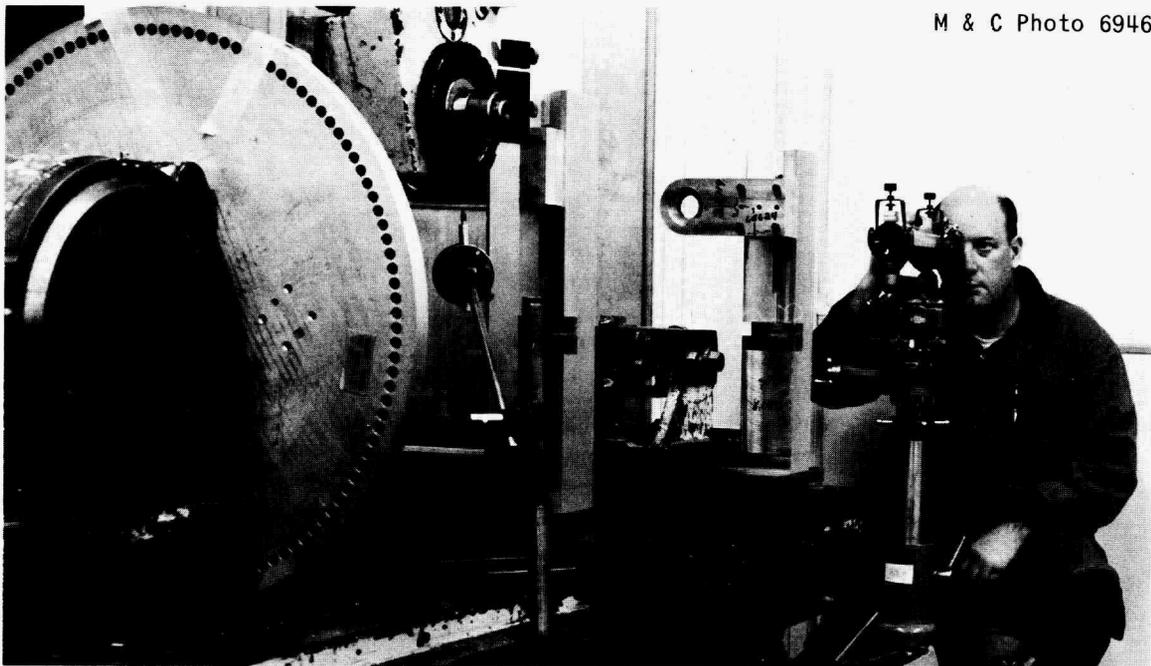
Optical Inspection of Slotting Cutter Alignment for Side Plate 3.
